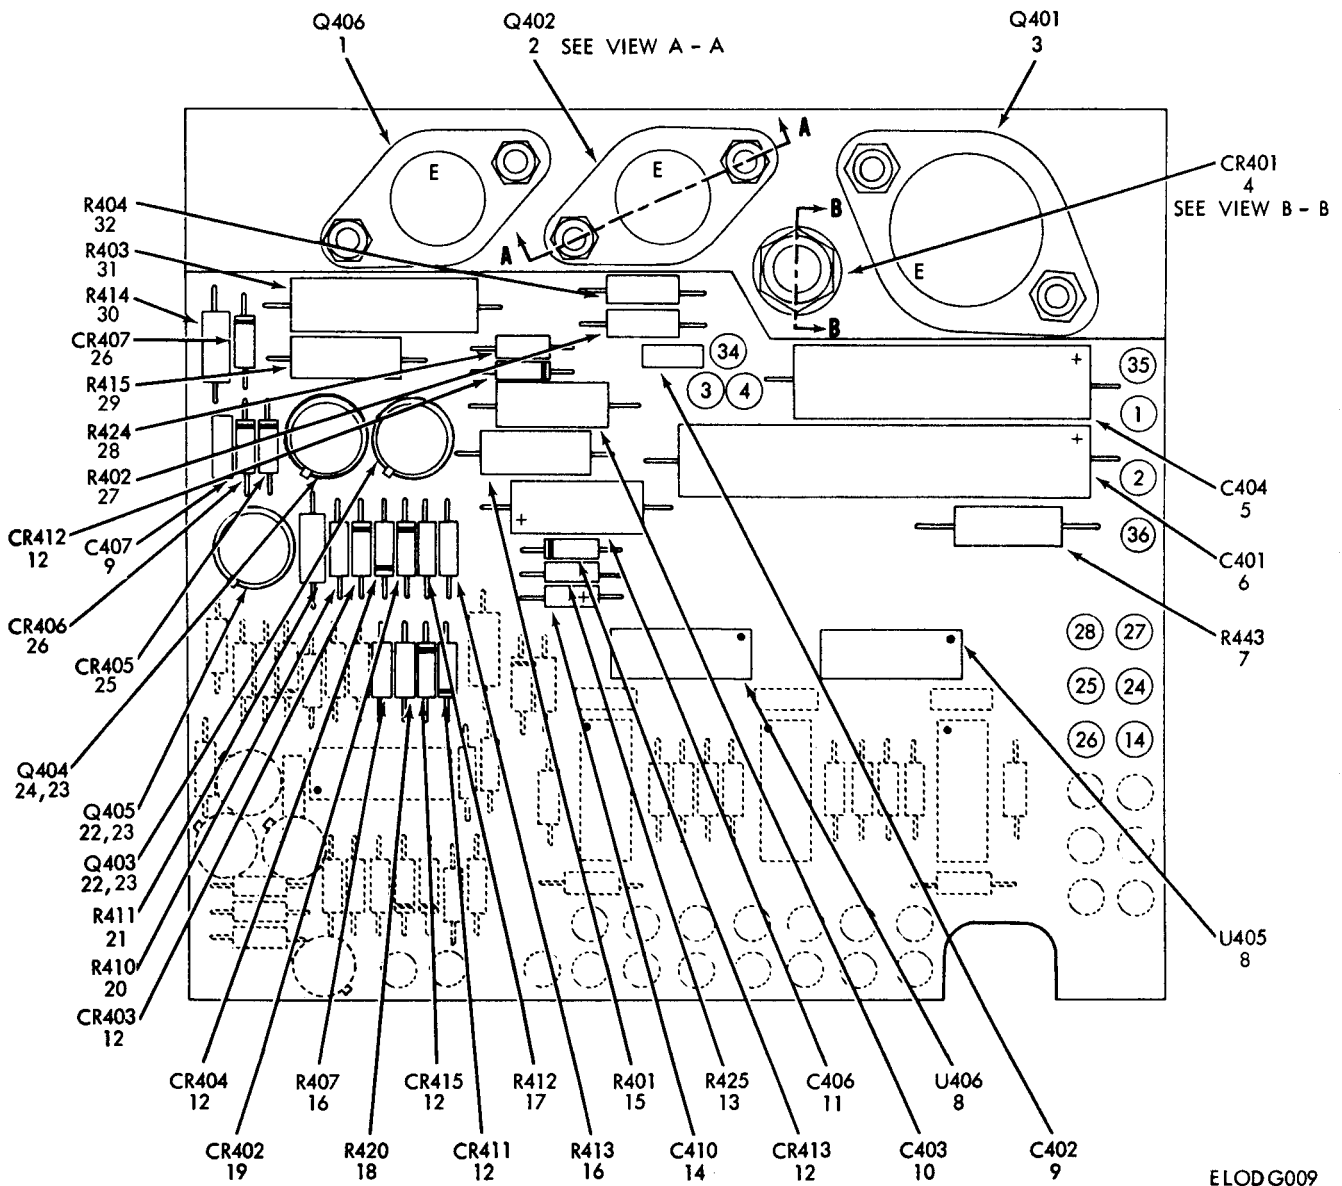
© Printed circuit board assembly, dc voltage regulator and data drive (sheet 1 of 2).
